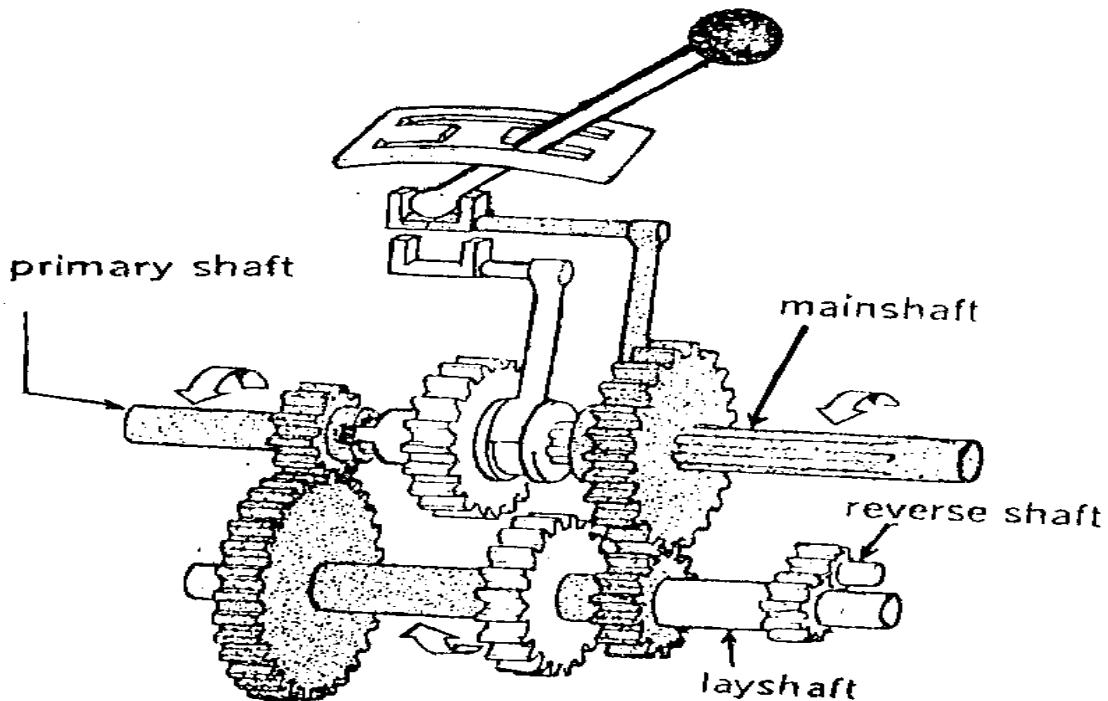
Lay, Reverse Shaft & Selector Mechanism
